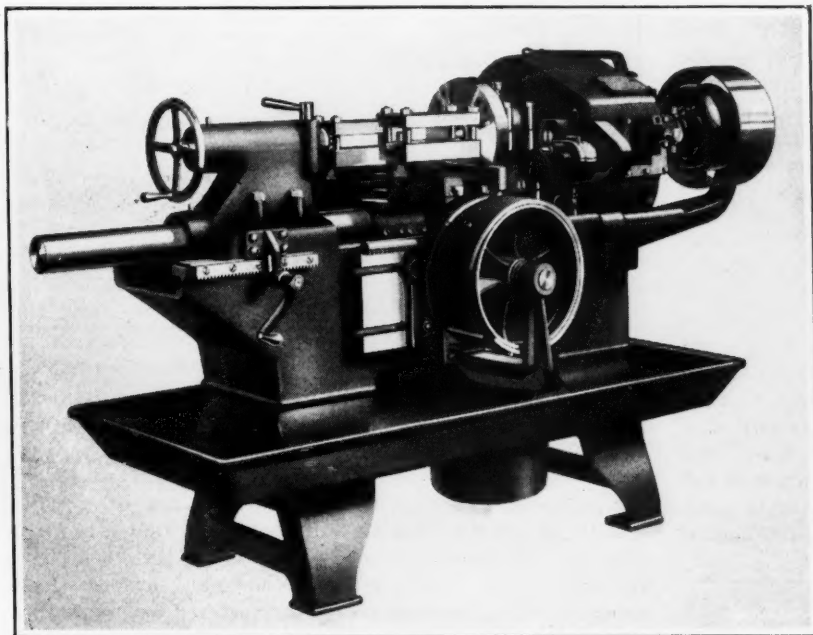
Rear View of Automatic Lathe shown in Fig. 1
